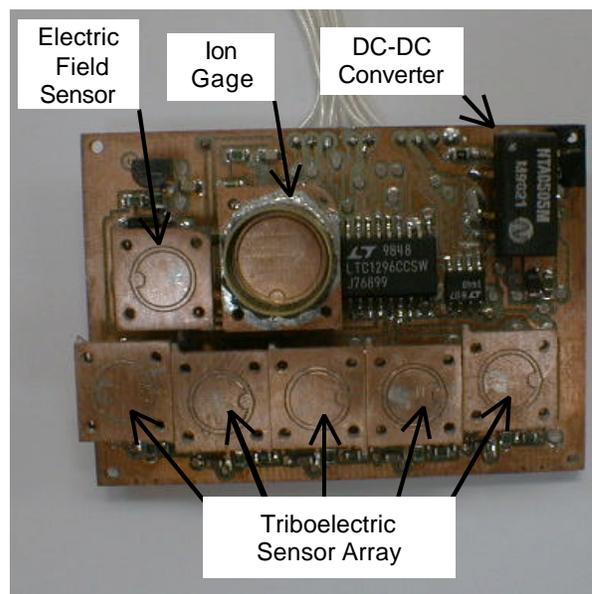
Top view of the 4.5 cm x 6.4 cm MECA/Electrometer printed wiring board showing the sensor electrodes.
